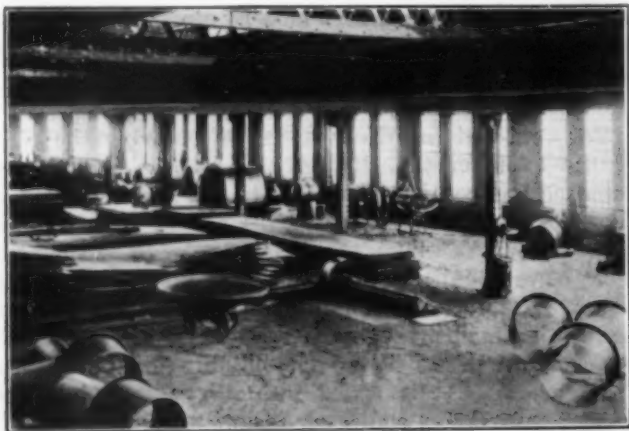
VIEW OF STEEL LAYOUT ROOM
